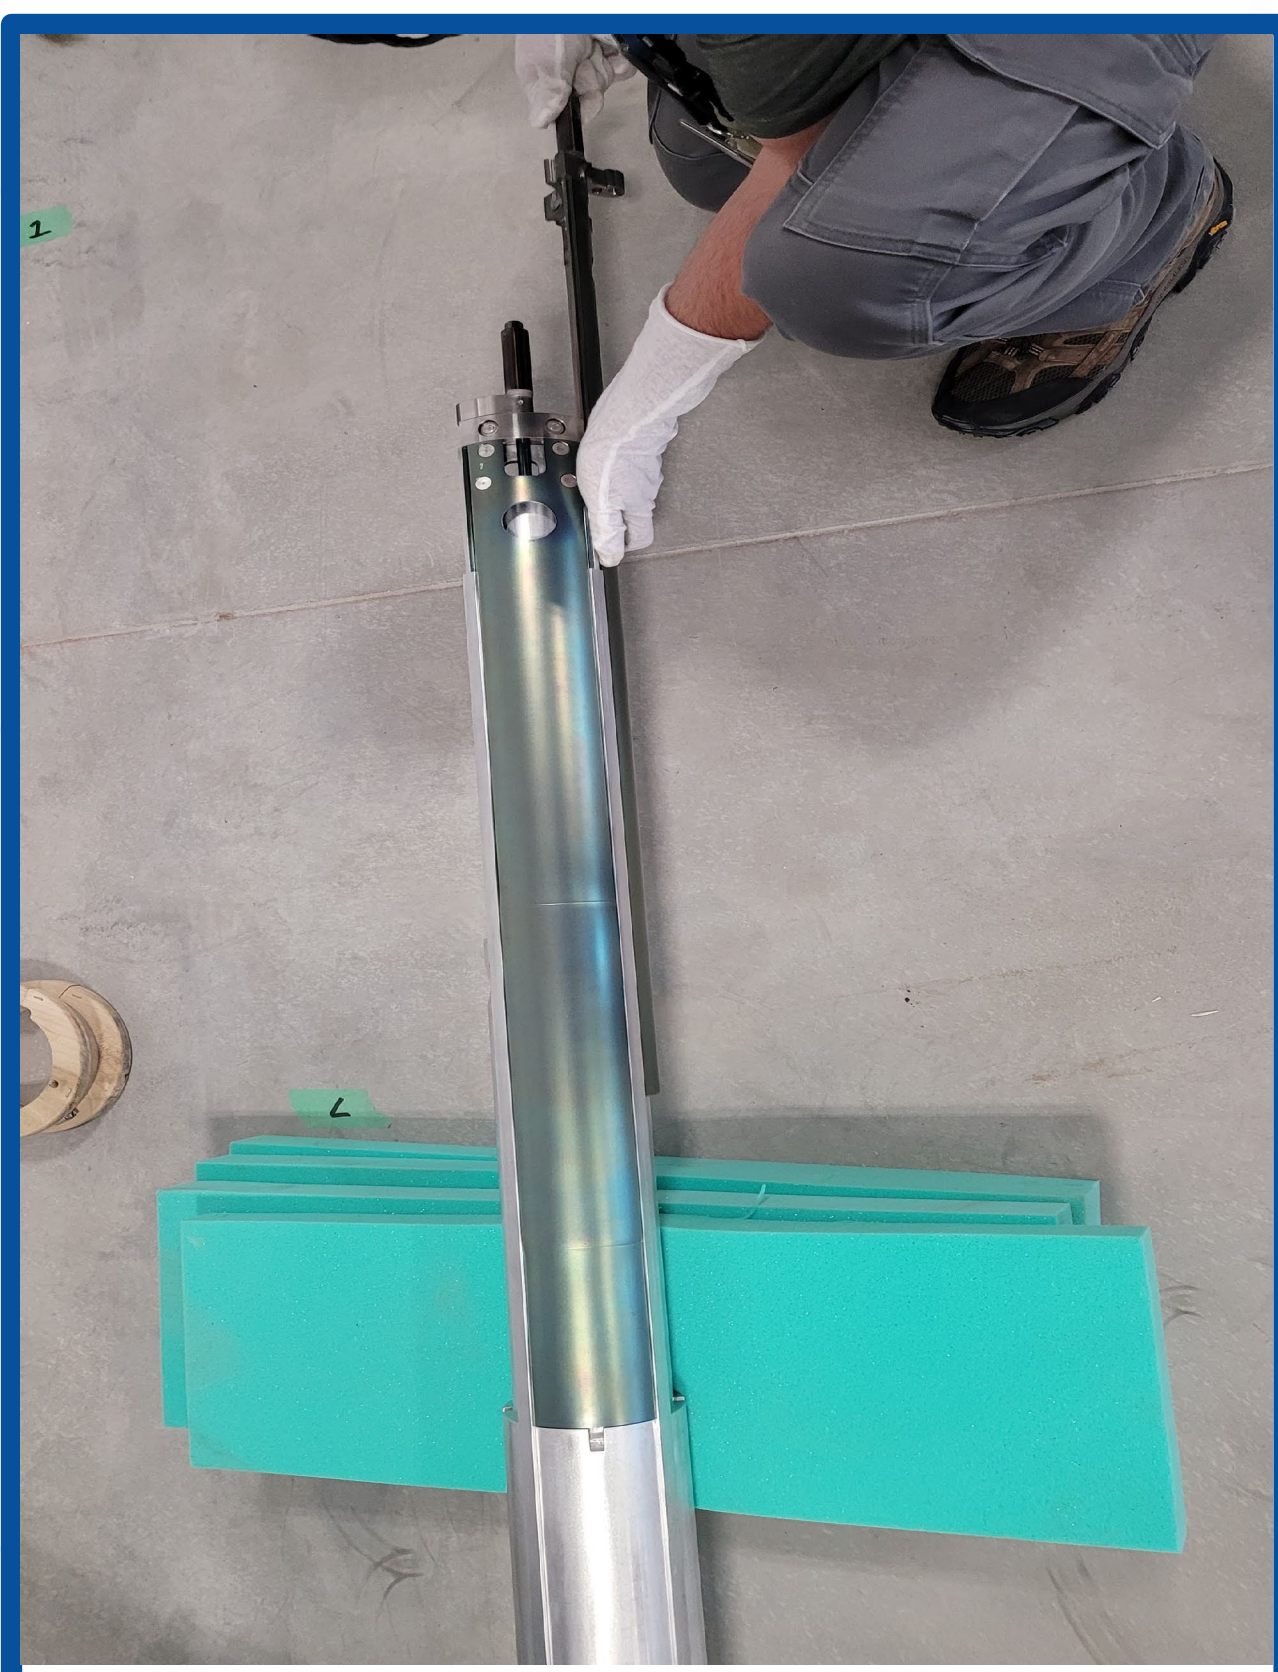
Picture from the recent CIC of HALM being installed onto the guide tube.
